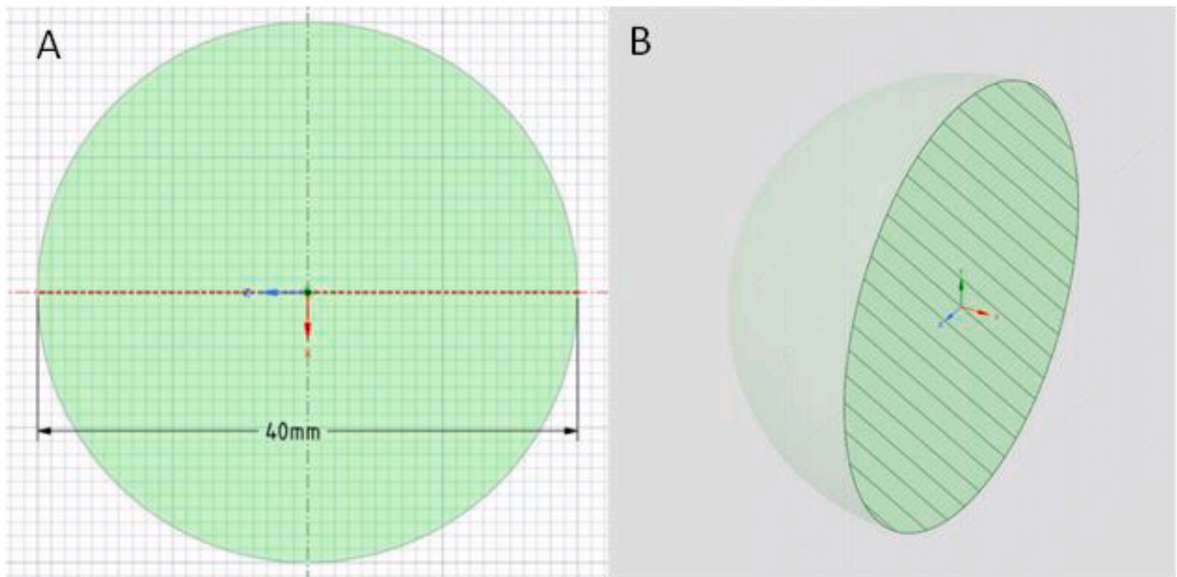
(A) Sketch of the sphere; (B) section view of the geometry in the drawing tool.
